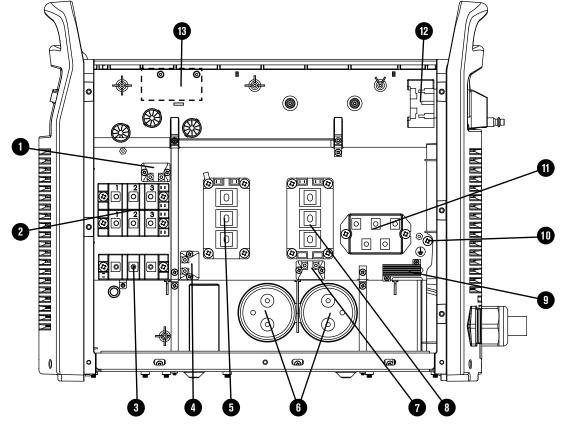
200 V - 600 V CSA plasma power supply (power PCB removed)
